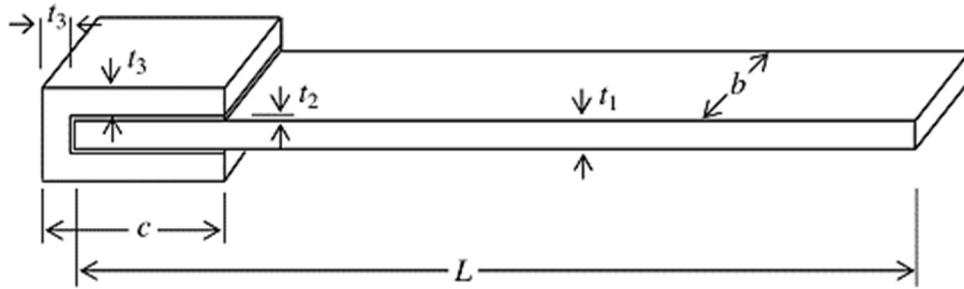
Adhesively bonded double containment cantilever joint [88]
